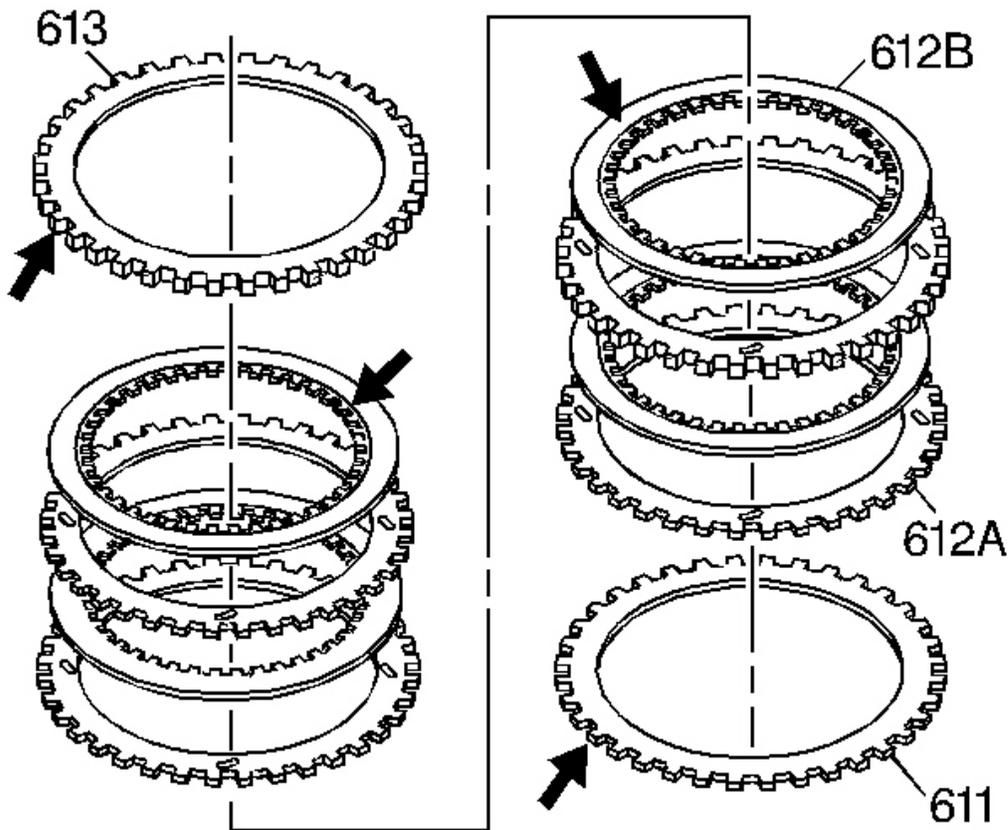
Inspecting (611), (612B), (612A) & (613)
